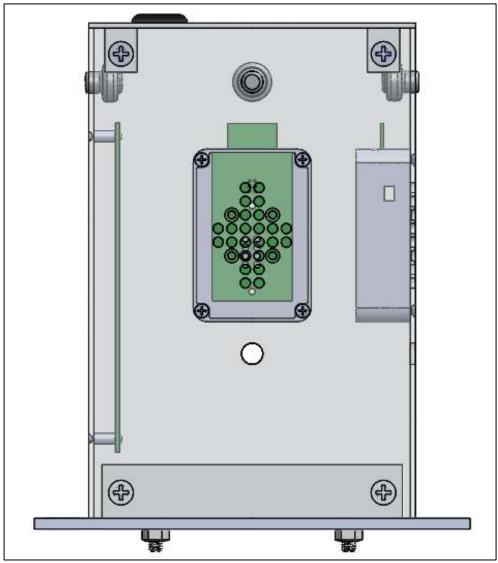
(d) Inside view of design of sides # 1 and 3 of the payload
